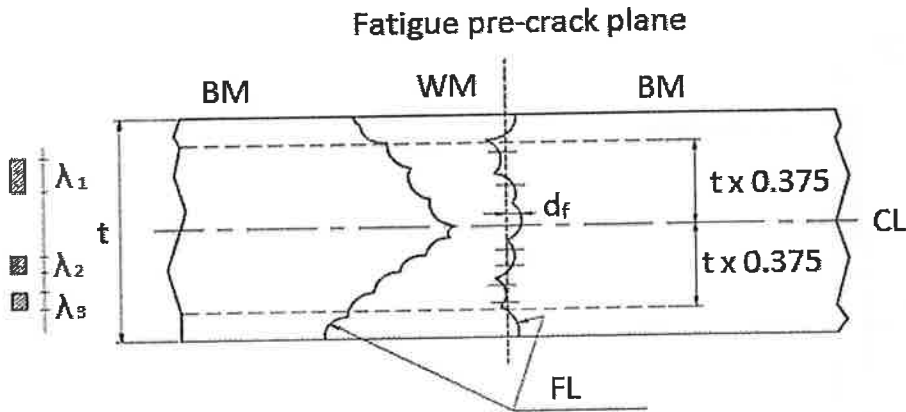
Unfractured specimen- Cross-section through the weld
